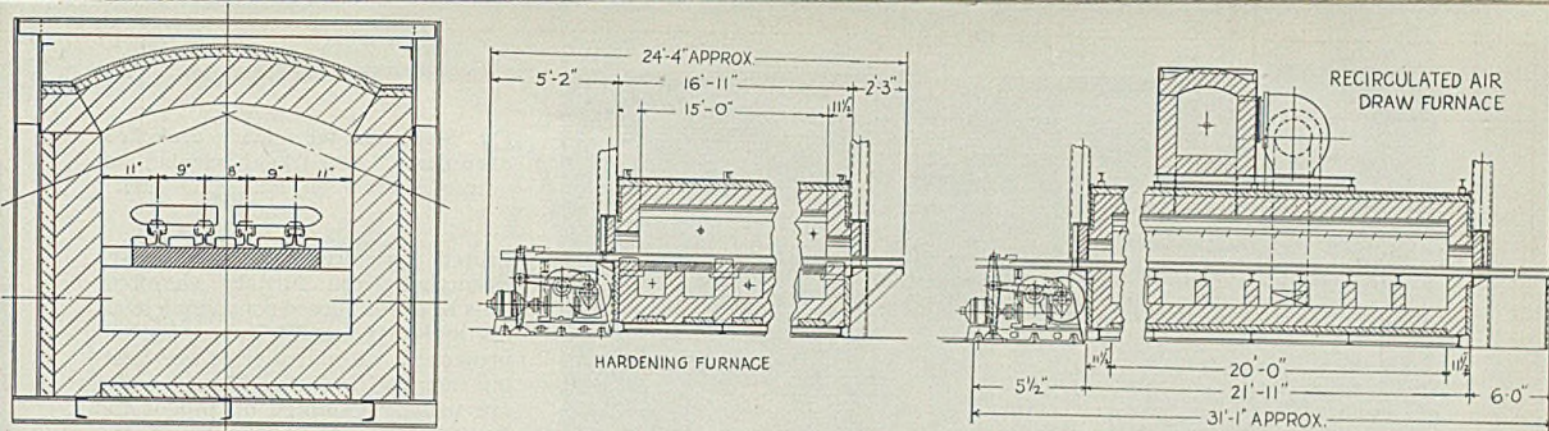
Left, above, is pusher-type hardening furnace; burners over and underfire the work. Projectiles rest on racks which are pushed through the furnace on rails as shown in cross section view. After being hand quenched, work is loaded into recirculated-air draw furnace at right, being handled here on racks pushed on rails as in hardening unit
